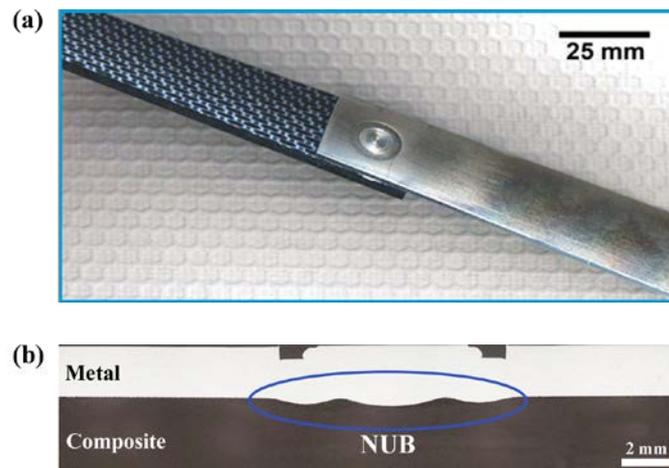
(a) Top view of a sound FSp joint, (b) cross-sectional macrograph of a joint, in which ellipse indicating the formed metallic nub.
